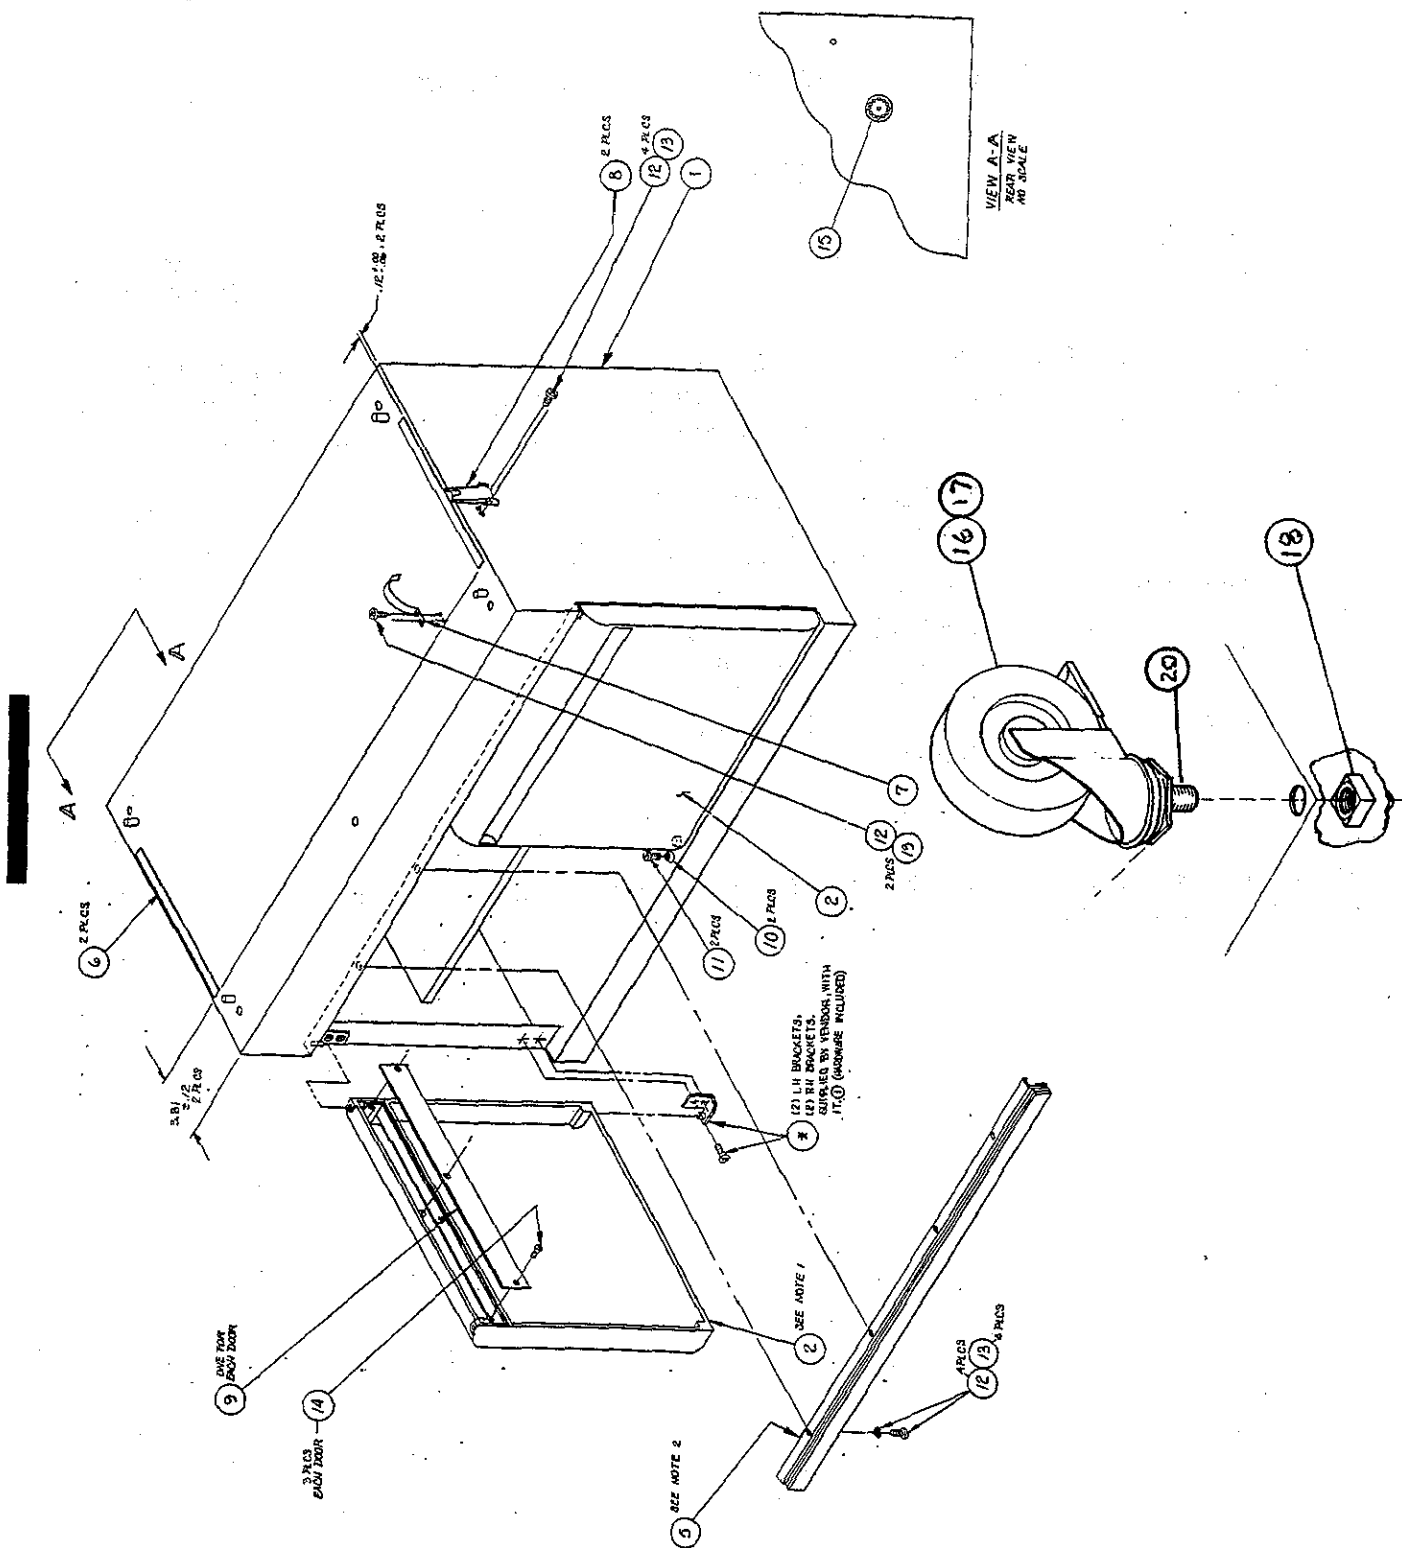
PARTS LOCATION DIAGRAM, CABINET STAND ASSEMBLY
